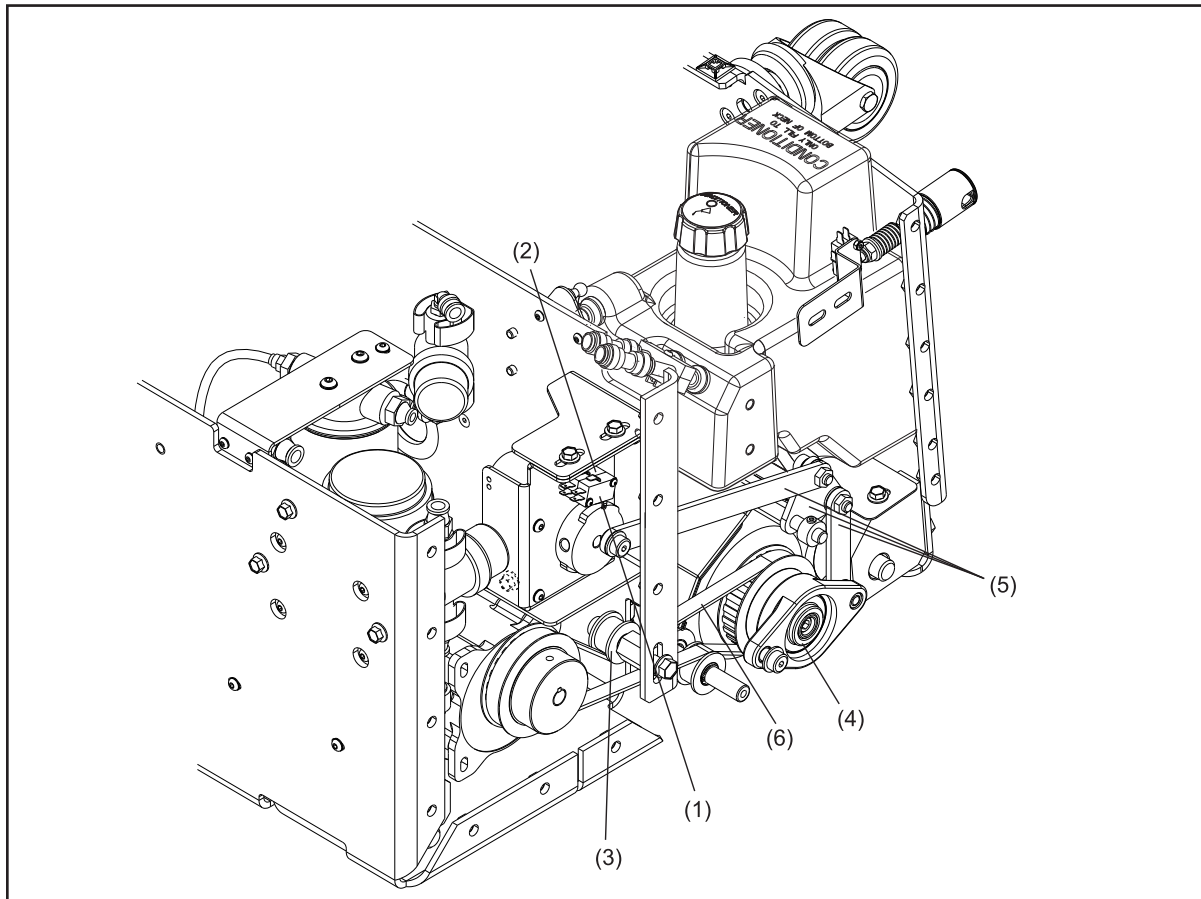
Adjusting Buffer Belt Tension, Replacing Buffer Up/Down Switches, Lubrication Buffer Brush Bearings and Lubricating Brush Lifting Assembly
